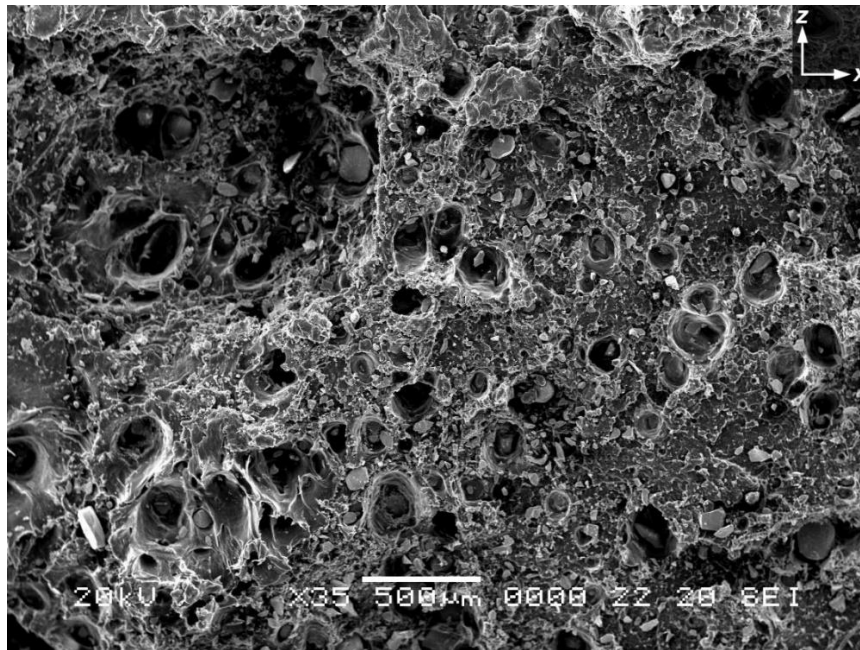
SEM of Y Tensile Bar - Ductile Fracture. PA-11 @ 0.3 J/mm³ (Leigh, Fracture Behavior in Laser Sintering, 2011)
